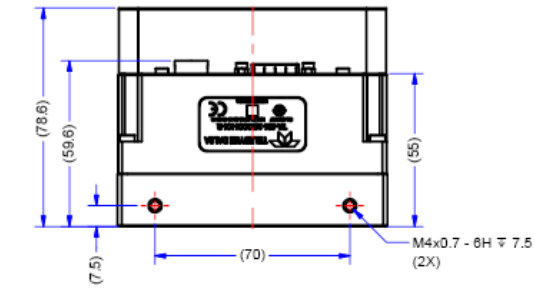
HL-FM-13K18H-00-R and HL-FM-16K15A-00-R Mechanical Drawing
